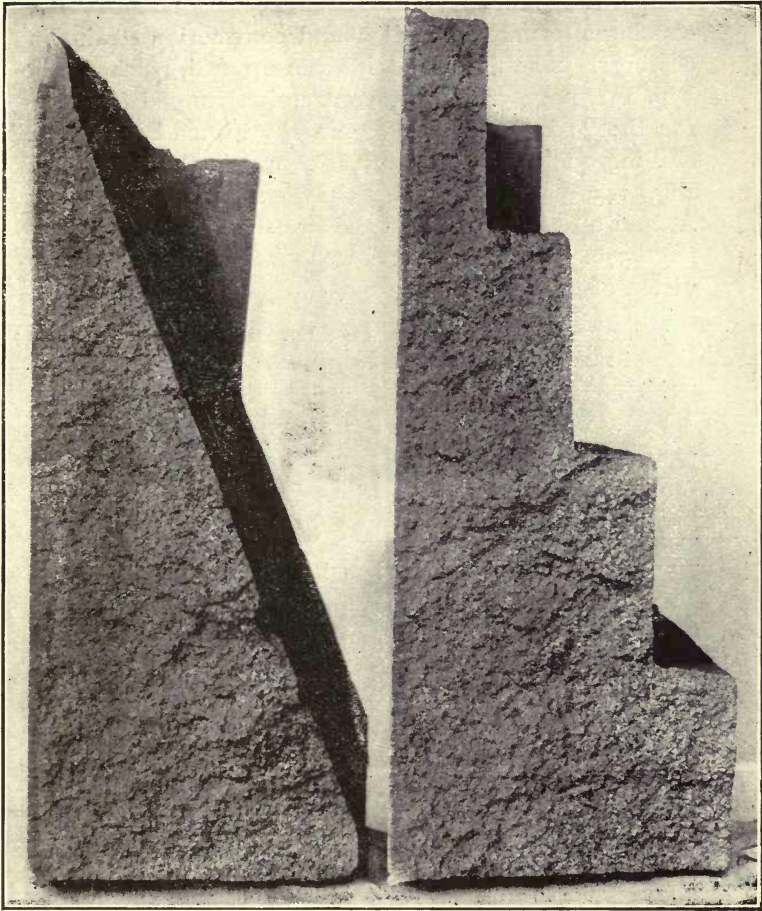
FRACTURE OF CHILL TEST PIECE IN SERIES A.
